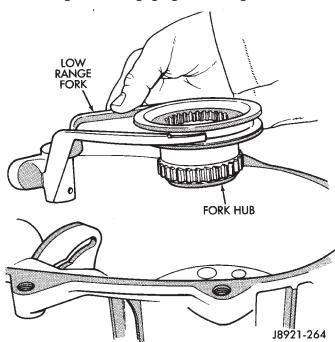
Low Range Fork And Hub Removal INPUT GEAR/LOW RANGE ASSEMBLY REMOVAL AND DISASSEMBLY
